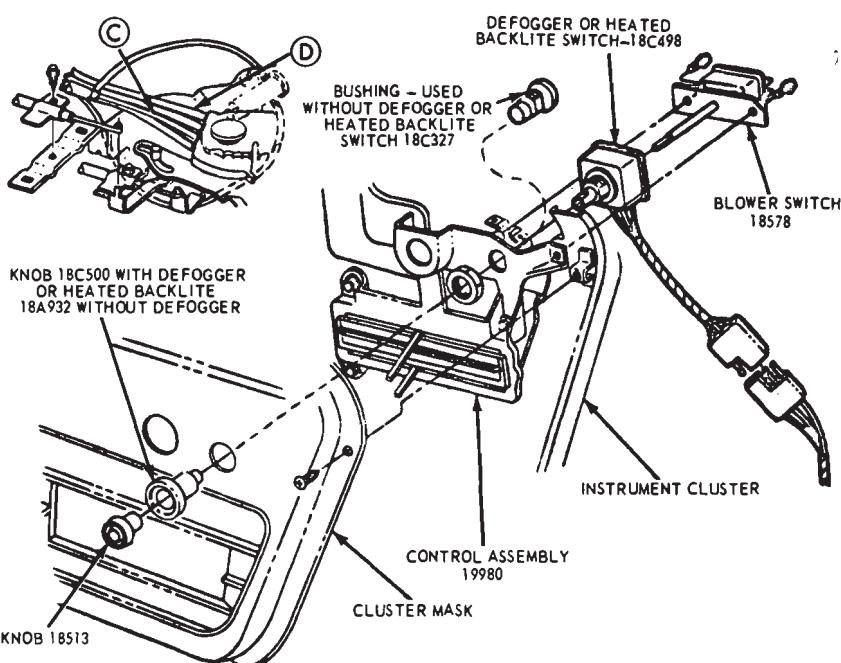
Heater-A/C Control Assembly—Ford and Meteor
